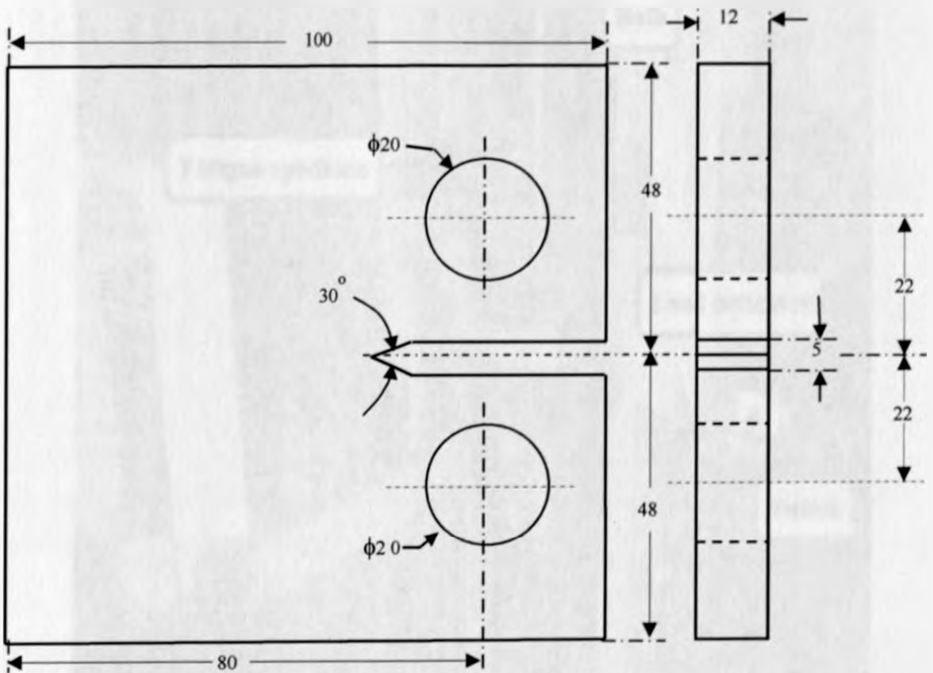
Dimensions of a CT specimen used for fatigue test in mm
